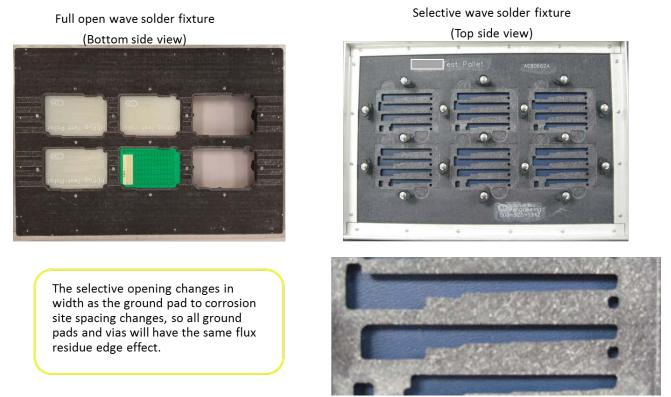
Open and Selective Wave Soldering Pallet Designs
